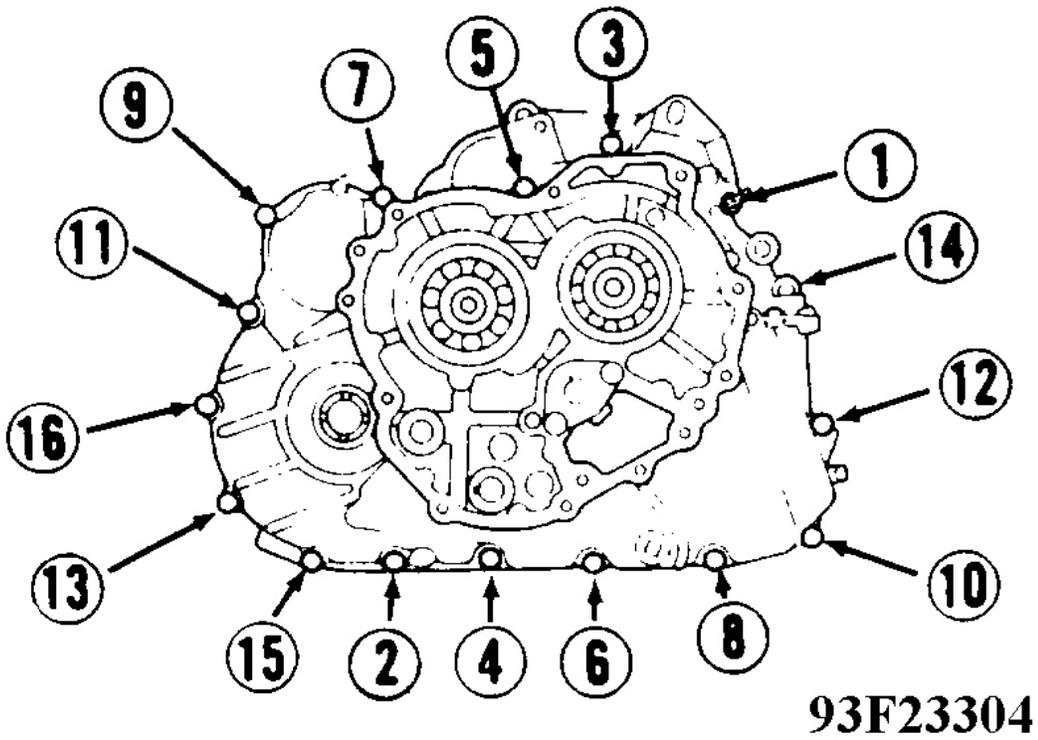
Transaxle Housing Bolt Tightening Sequence
